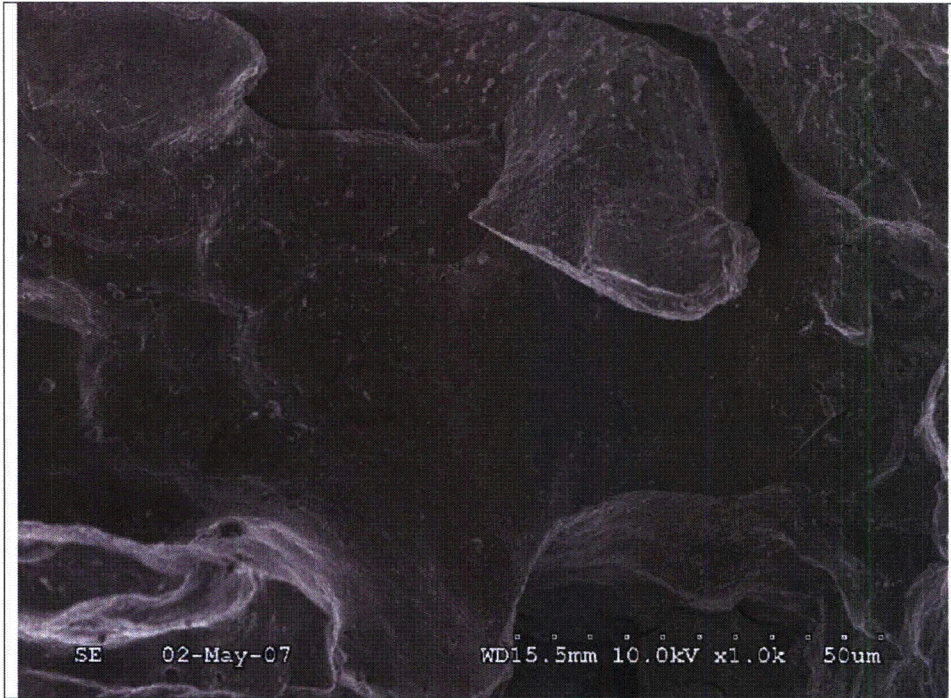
Another smooth crack surface region in the Sample A1 weld. The smooth appearance is considered more typical of a hot crack than stress corrosion cracking. (1000x Magnification.)
